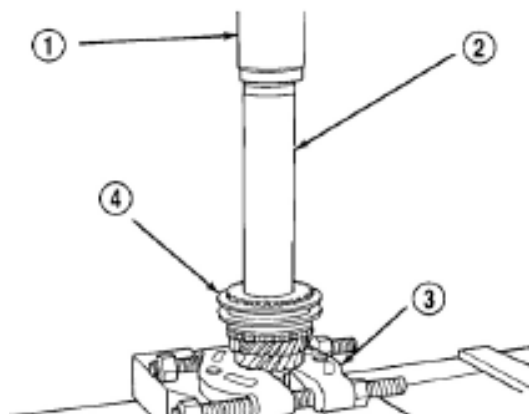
Press mounting the third gear and synchronizer gear hub
